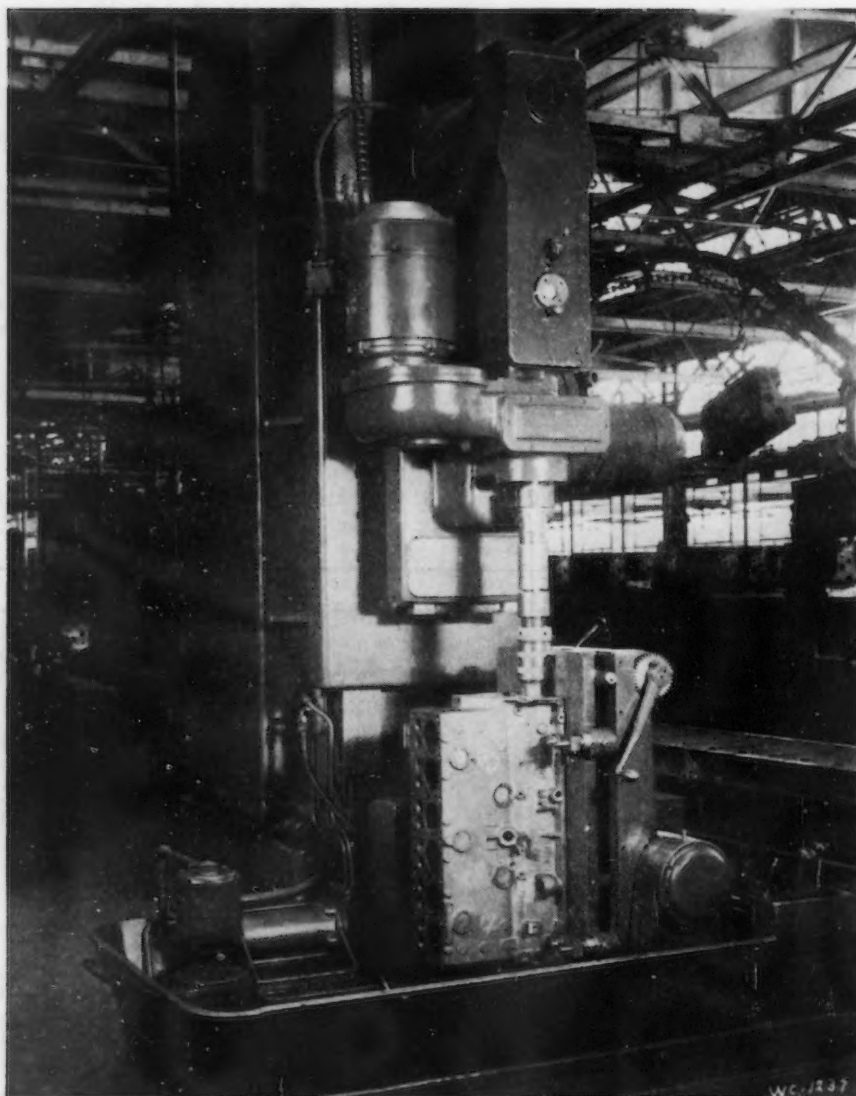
One of the largest pieces of Superfinishing equipment used by Chrysler. Processing the holes in which crankshaft main bearings are carried helps to eliminate the "wear in" formerly required in autos.
